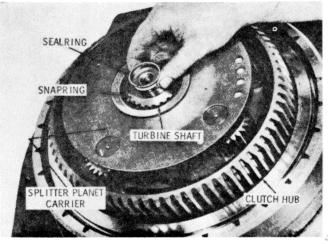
Removing Hook-Type Seal Ring from Rear of Turbine Shaft
